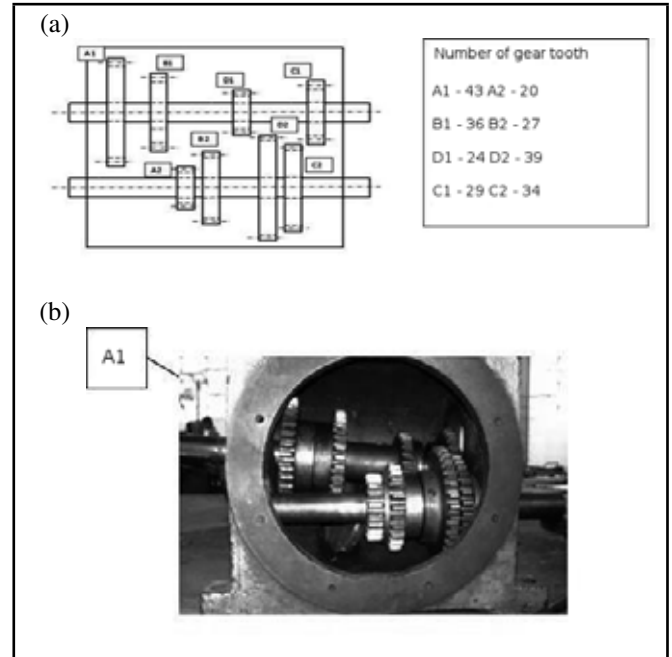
a) Gear train layout of main gear box; b) Inner view of main gear box.
